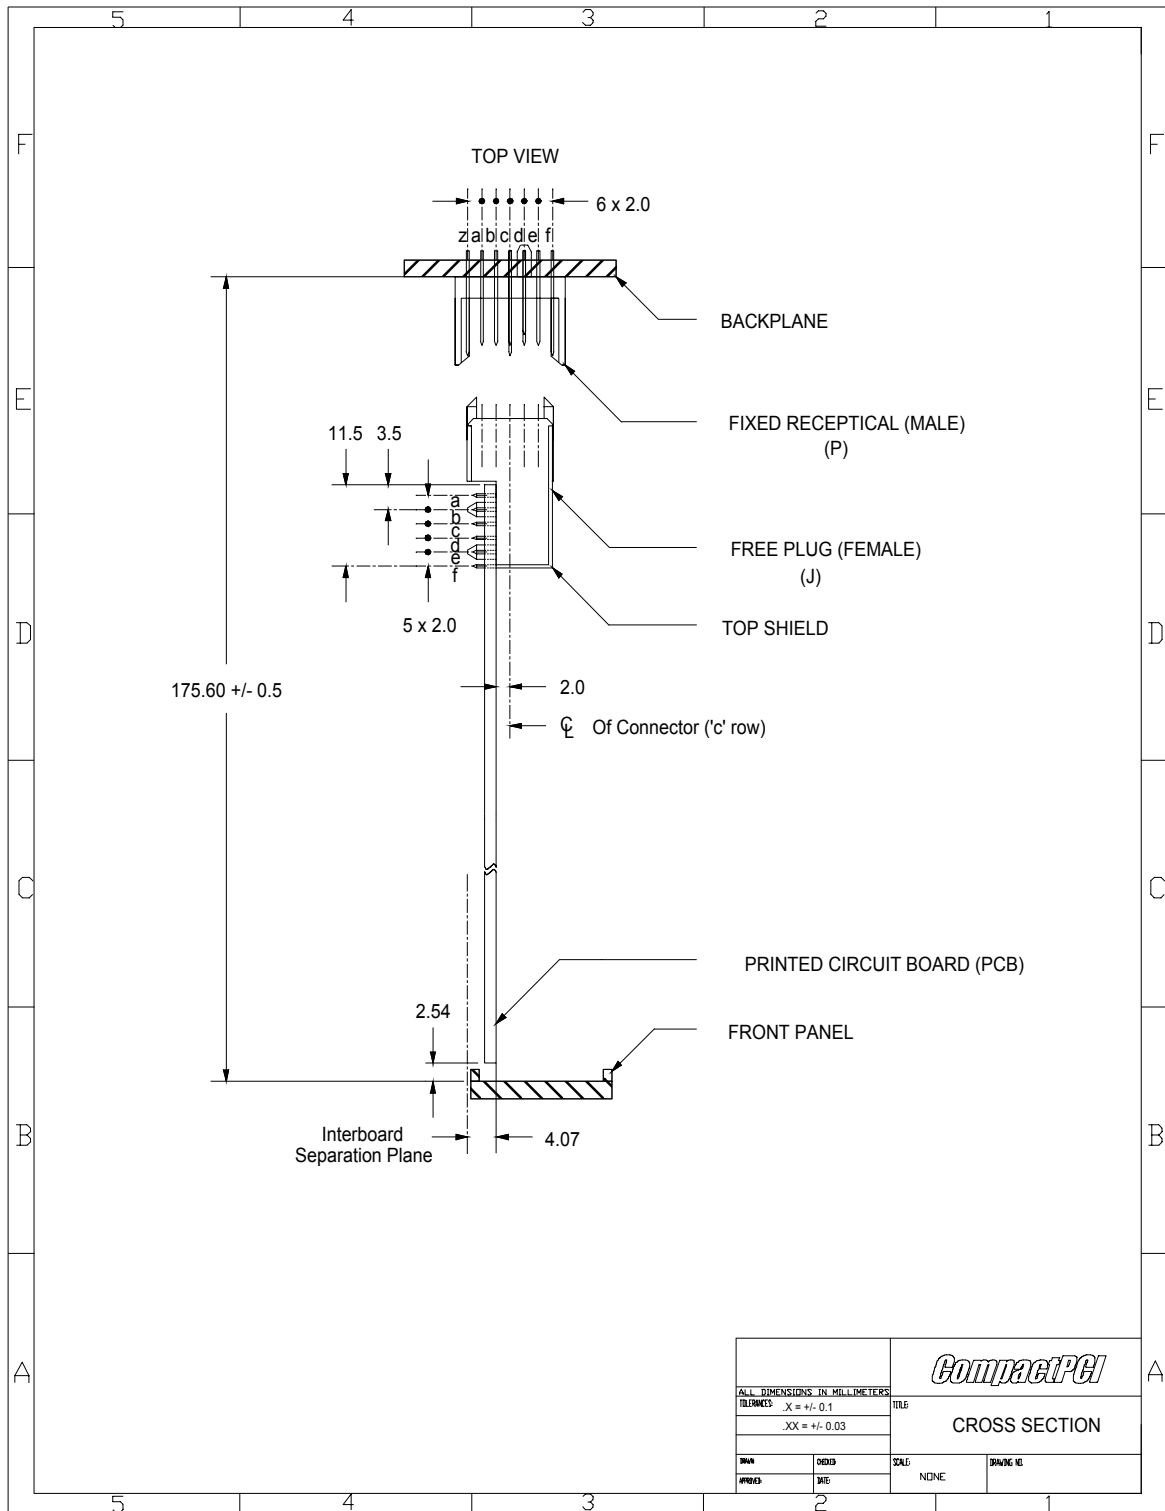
Cross Sectional Board, Connector, Backplane and Front Panel View.
